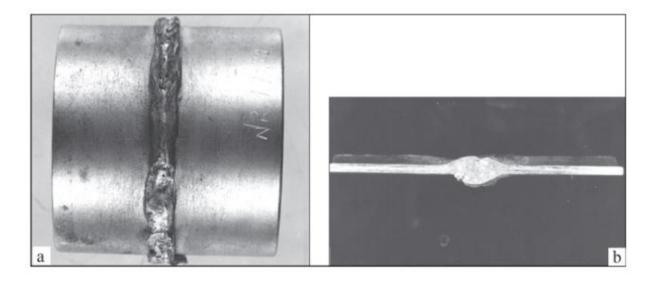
Appearance of welded joint on a cylindrical sample (a) and its cross section (b). [22]
